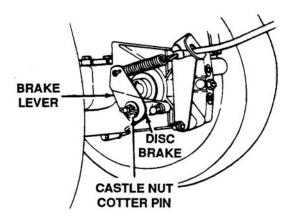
Brake Adjustment 700 and 800 Series Hydrostatic
